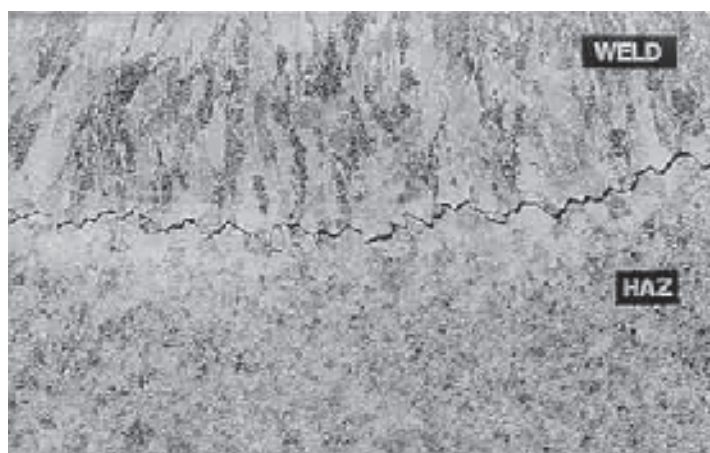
Cracking by post weld heat-treatment<sup>[19]</sup>.
